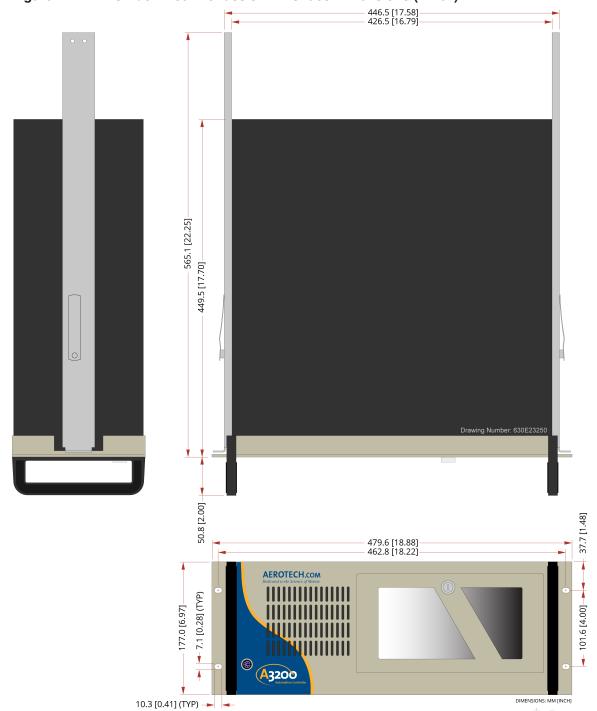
4U Rack Mount Chassis with Slides Dimensions (-R401)
